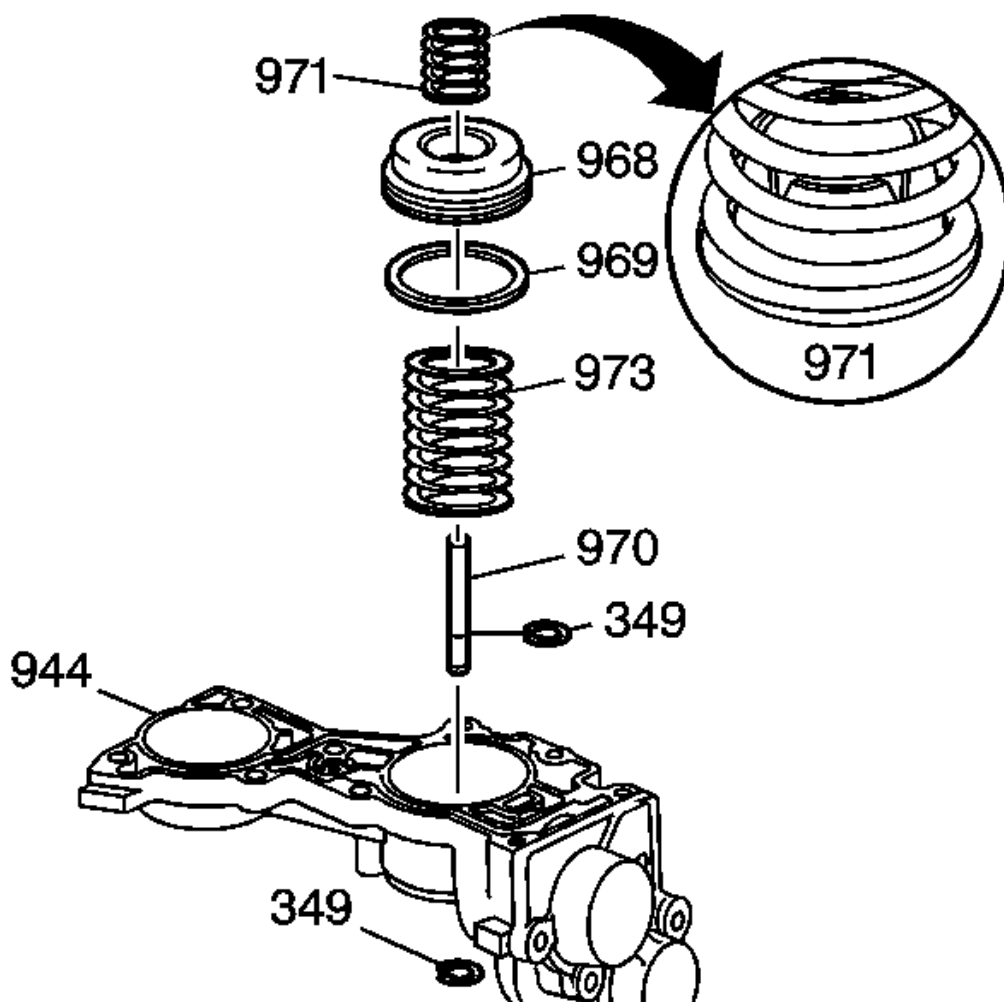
Expanded View Of 1-2 Accumulator Assembly
